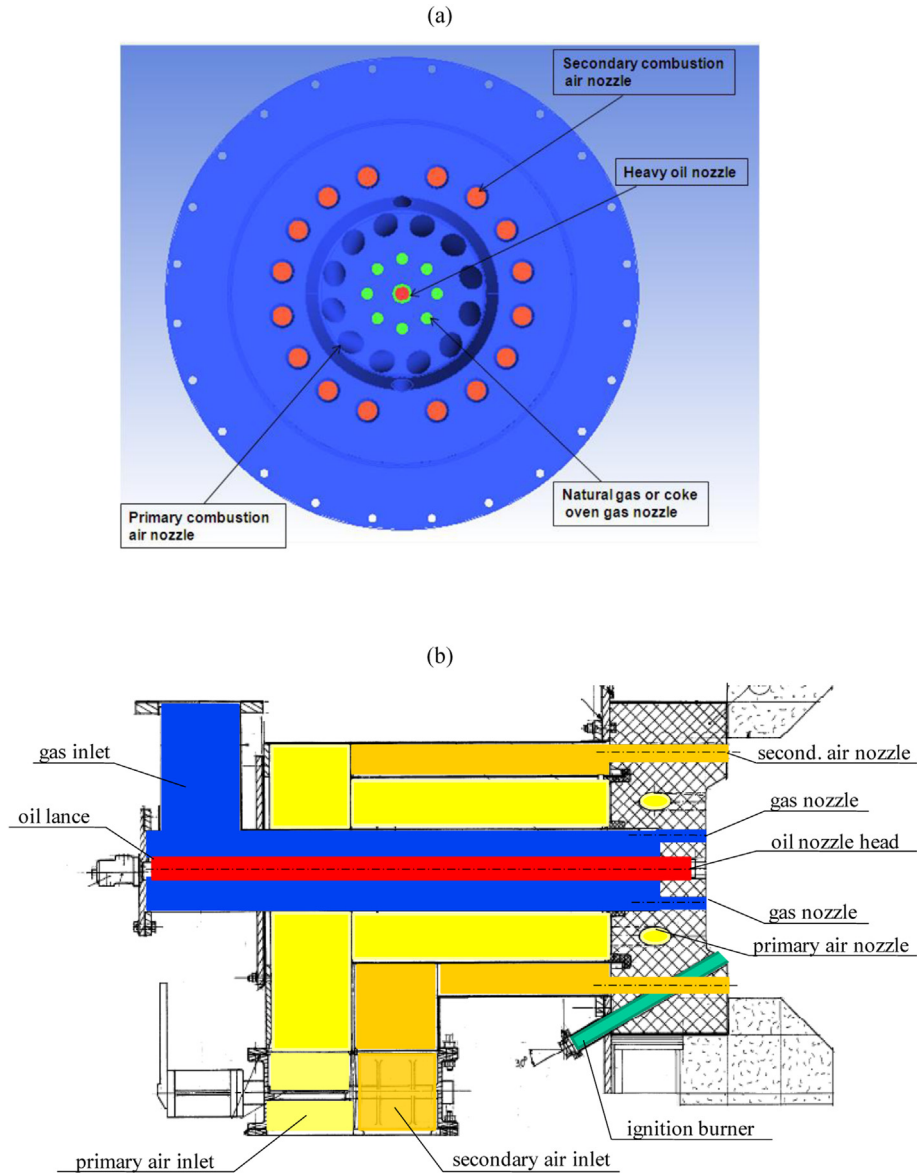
The BHF.M.10-type burner, furnace side: front view (a), side view (b).
